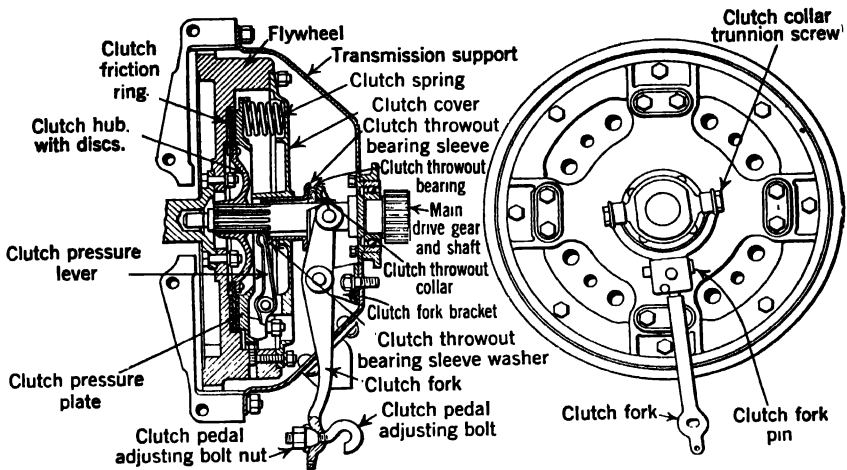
Single-disk Dry-plate Clutch. (Chevrolet)
